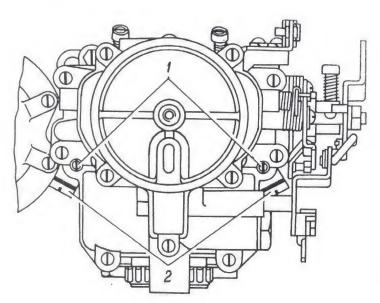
CARBURETTOR K-126M (PLAN VIEW)
